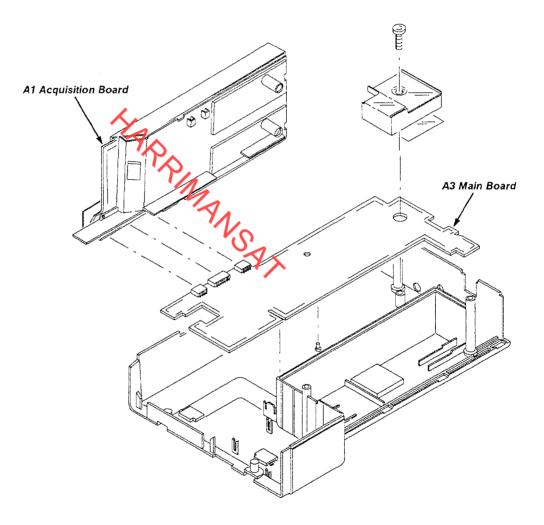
Removing the Main and Acquisition Boards as an Assembly
